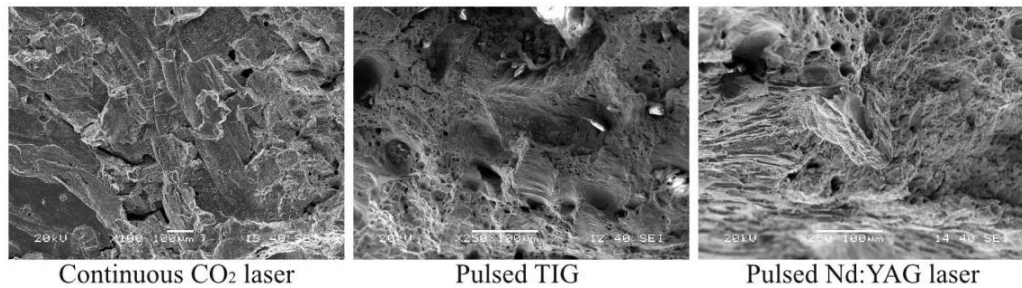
Fracture surface morphology of weld after tensile test for different welding processes.
